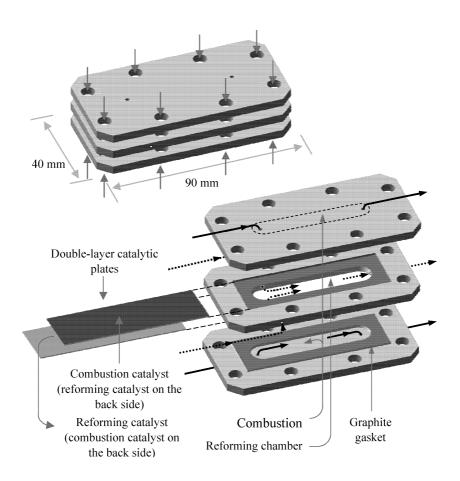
Exploded and assembled reactor CAD-view. Solid arrow combustion stream – dotted arrow: reforming stream
